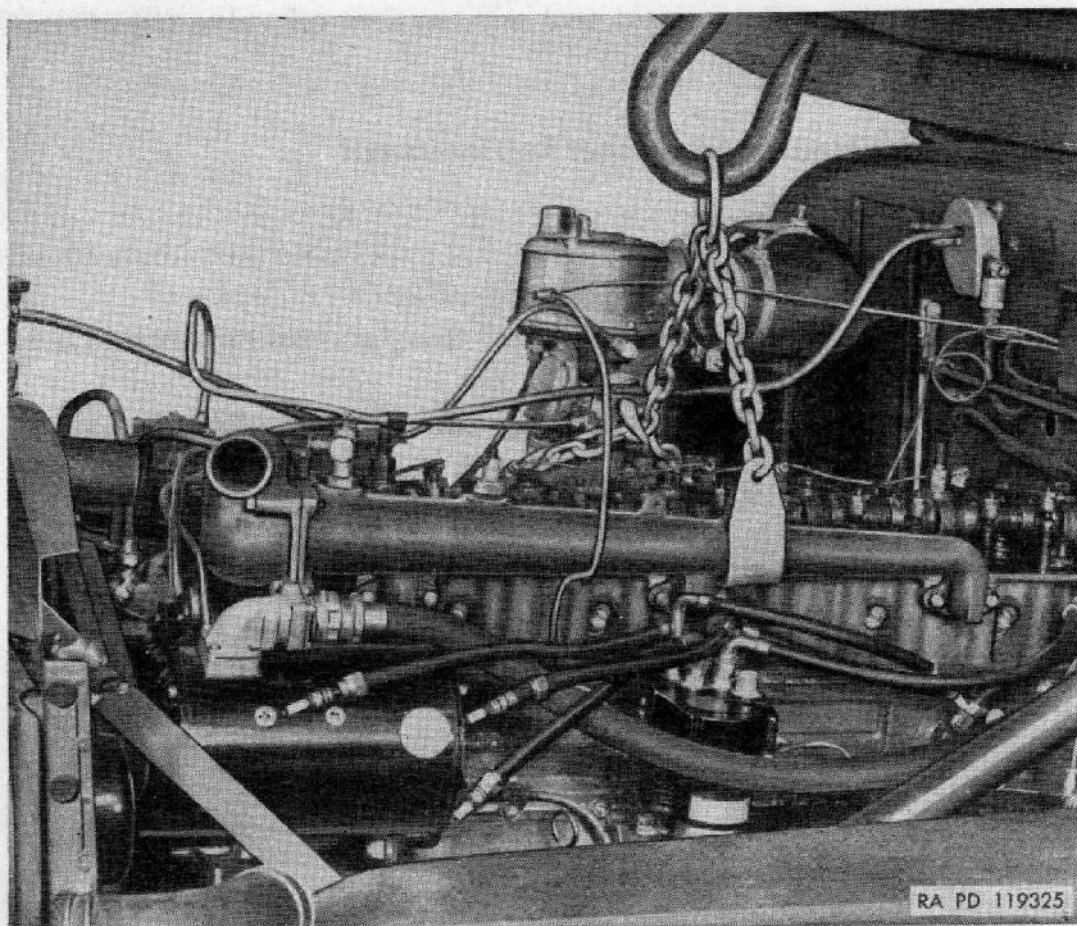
Removing cylinder head using sling 41-S-3829-750.
